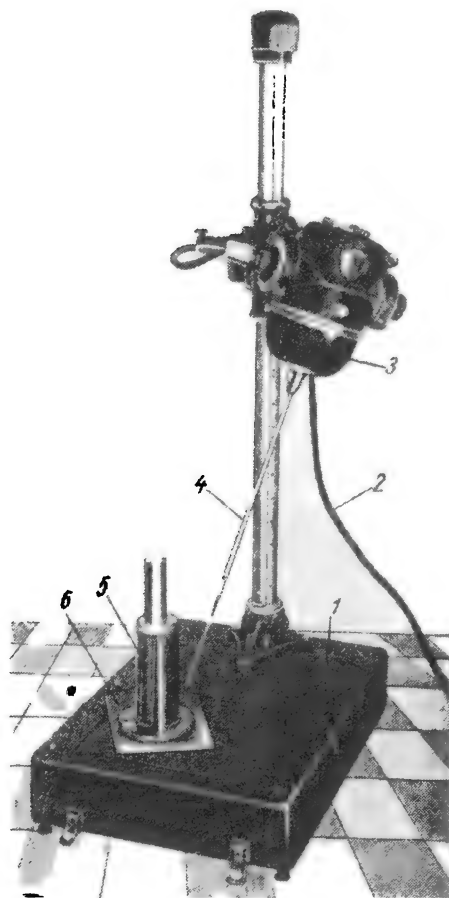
Preparation of part to be radiographed on type PK-1 inspection unit:
